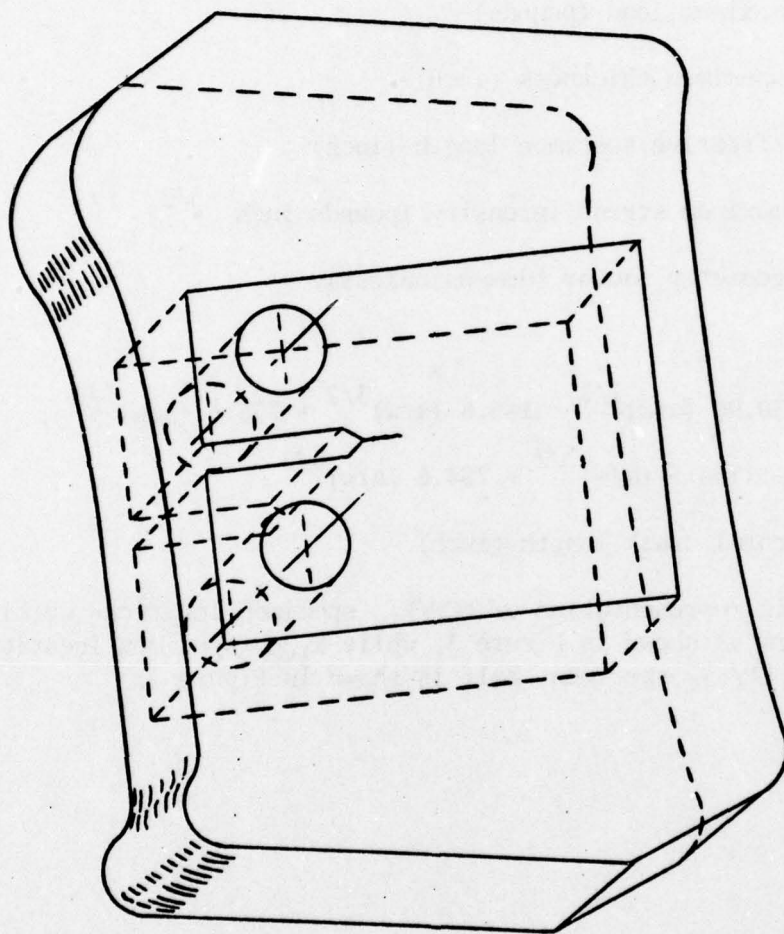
Location of compact tension specimen in typical forging (platform section only shown).
